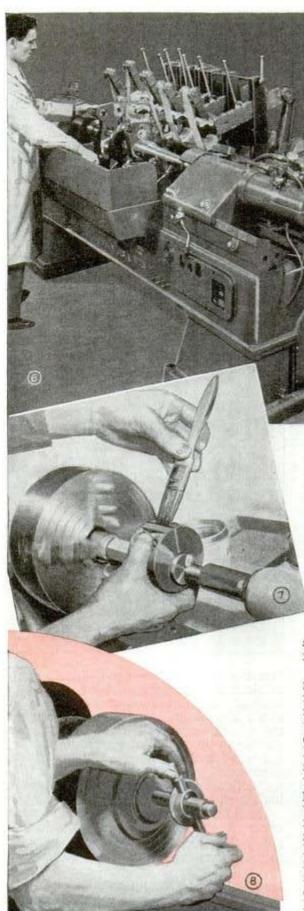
shows such a machine which laps all bearings on a crankshaft simultaneously.
